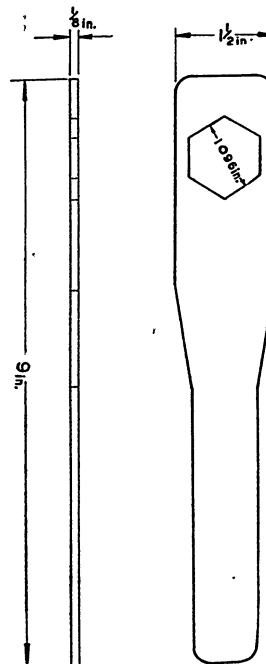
Suggested ring spanner for removing the oil pressure relief valve cover
